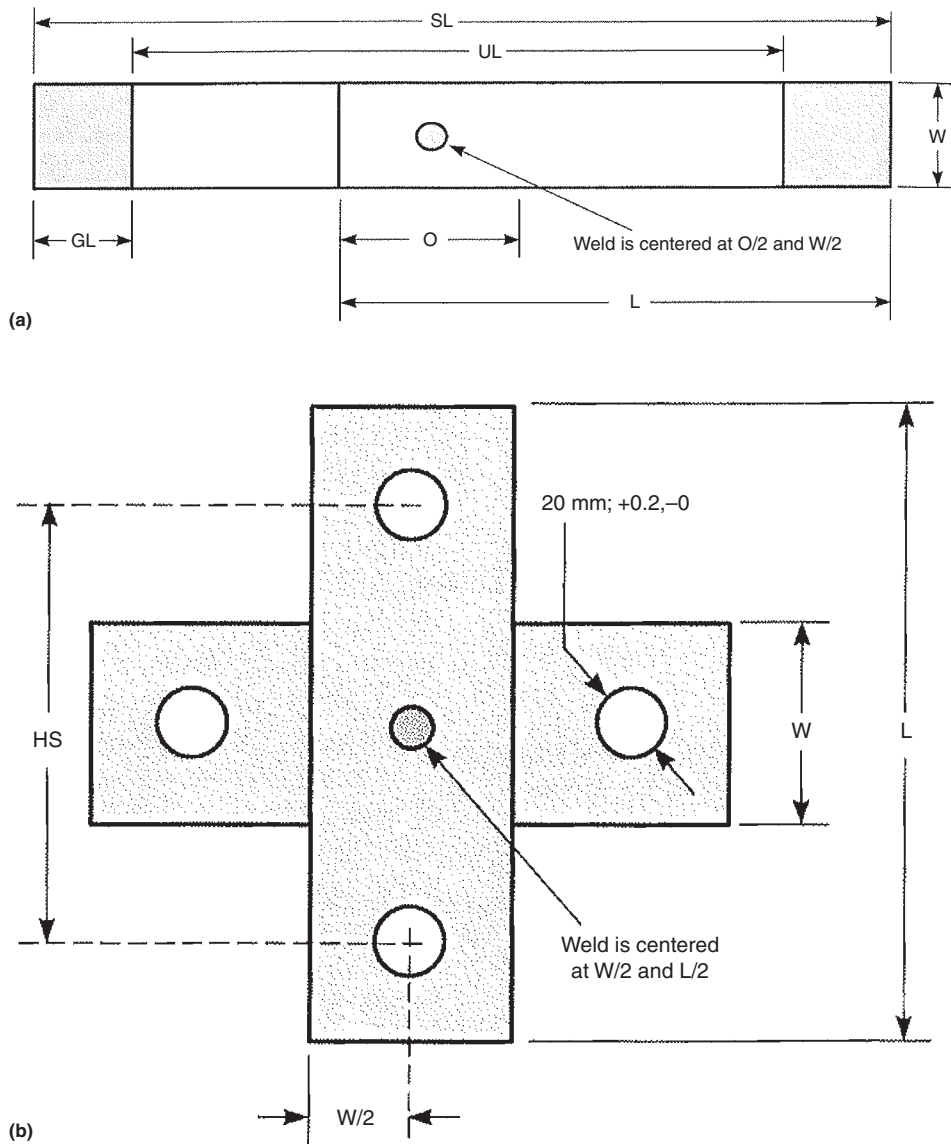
Schematics showing the dimensions and layout of (a) shear-tension and (b) cross-tension test samples. Source: Ref 7
